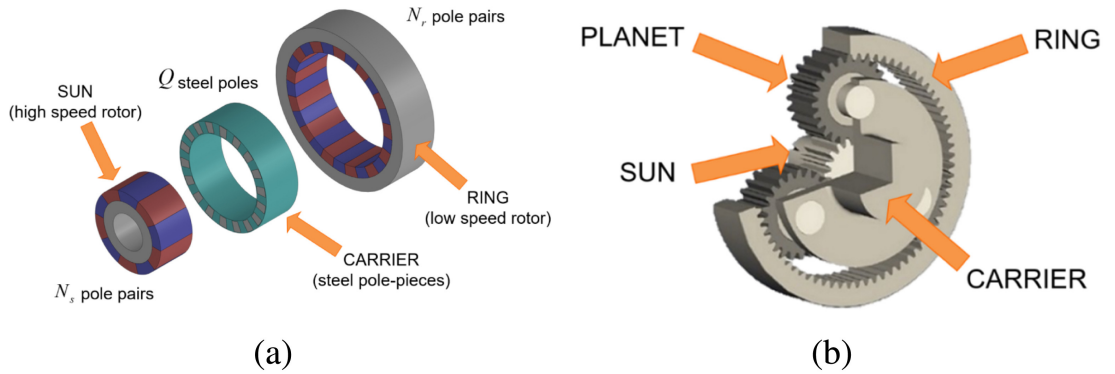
Exploded view of the SM-CMG and corresponding elements of a mechanical planetary gear [10].
